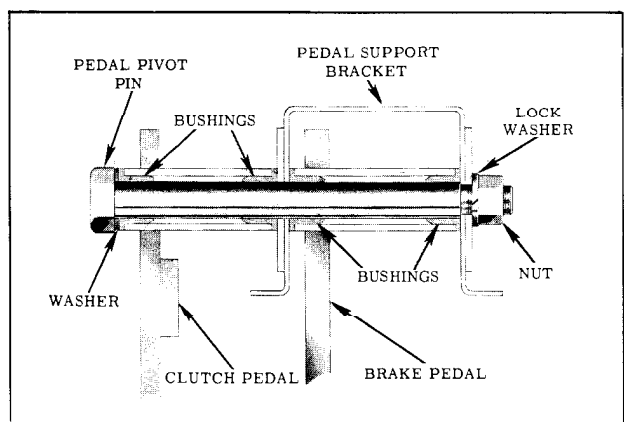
Syncro-Mesh Brake Pedal Attachment
